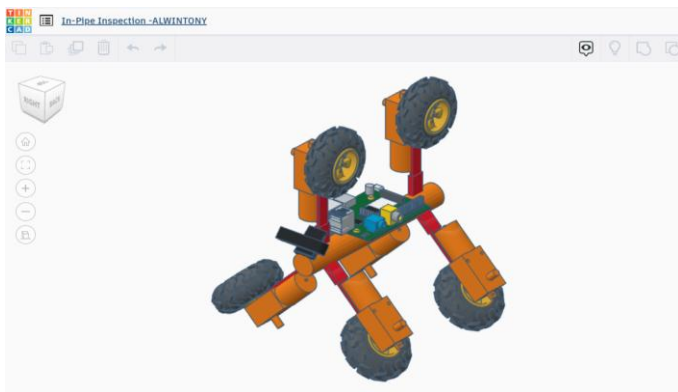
Overall Dislocated assembly of Design (Fusion 360)
